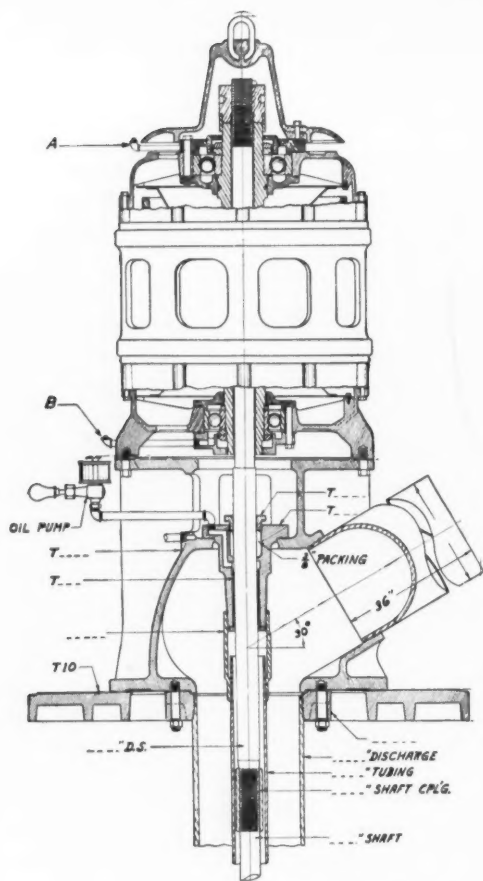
Section of a Layne Type TI-7 pump head showing oil pump for shaft bearings, and at A and B the lubricator extensions for serving the ball bearings of the electric motor.
